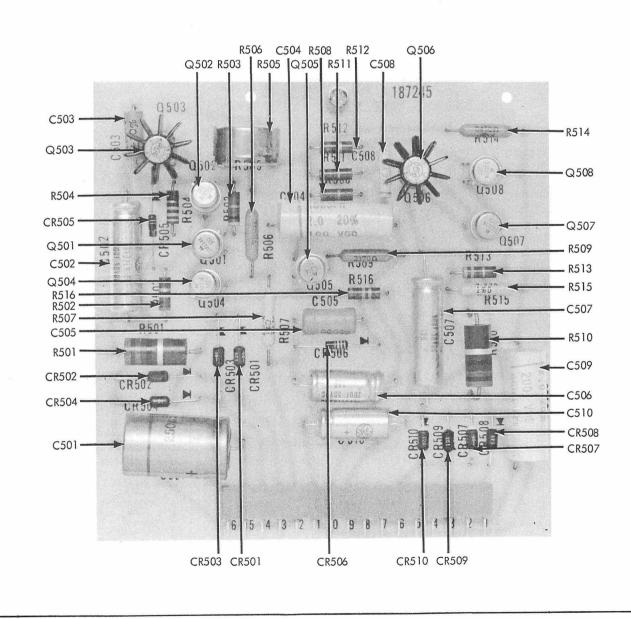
AUXILIARY SUPPLY ASSEMBLY
